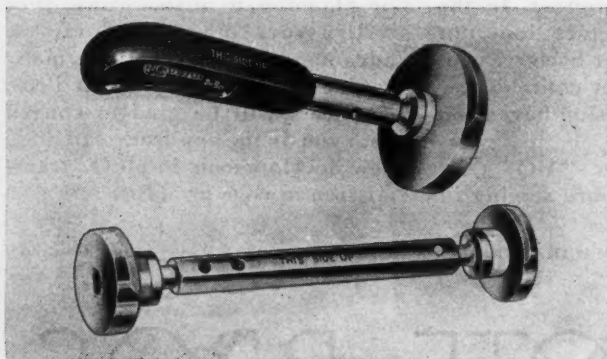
"DuBo" Single- and Double-end Plug Gages
